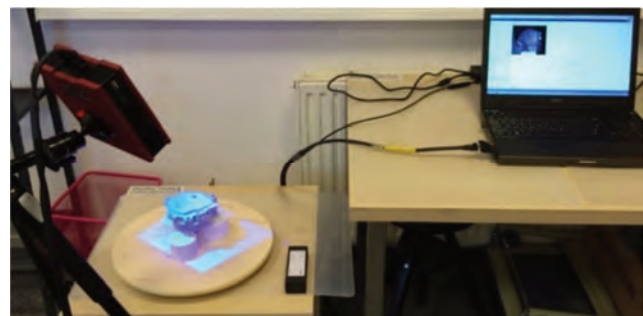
Optical scanning process of an camshaft control motor using GOM's ATOS Core
